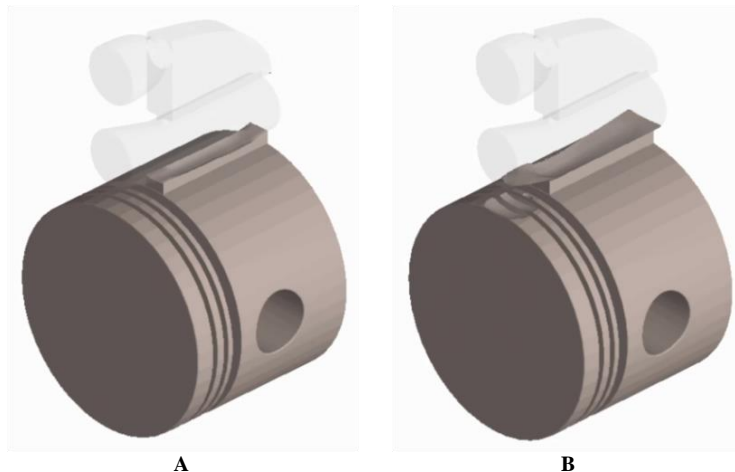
The cast iron piston (A) and the aluminium piston (B) after casting with the metal mold tilt by 90 degrees.
